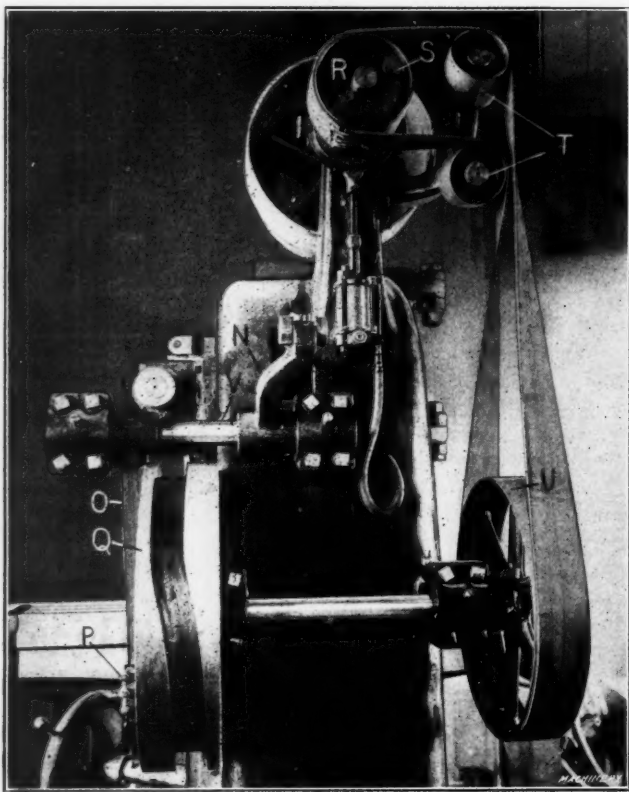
Rear View showing Drive for Cam-wheel and Compressed Air Pump
